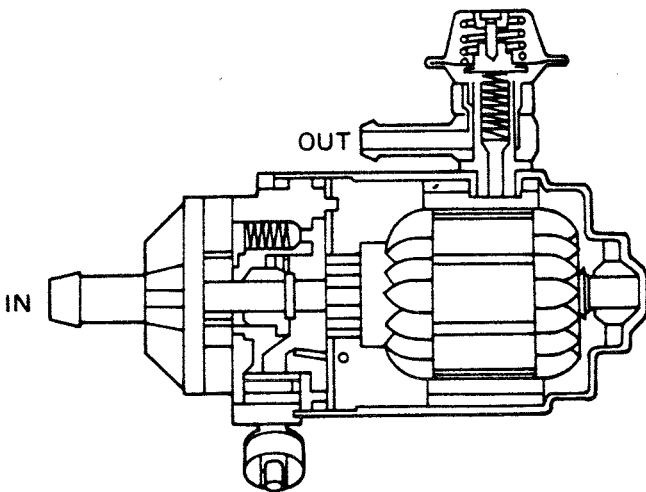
(B) Wet type (Motor driven) Fuel Pump
